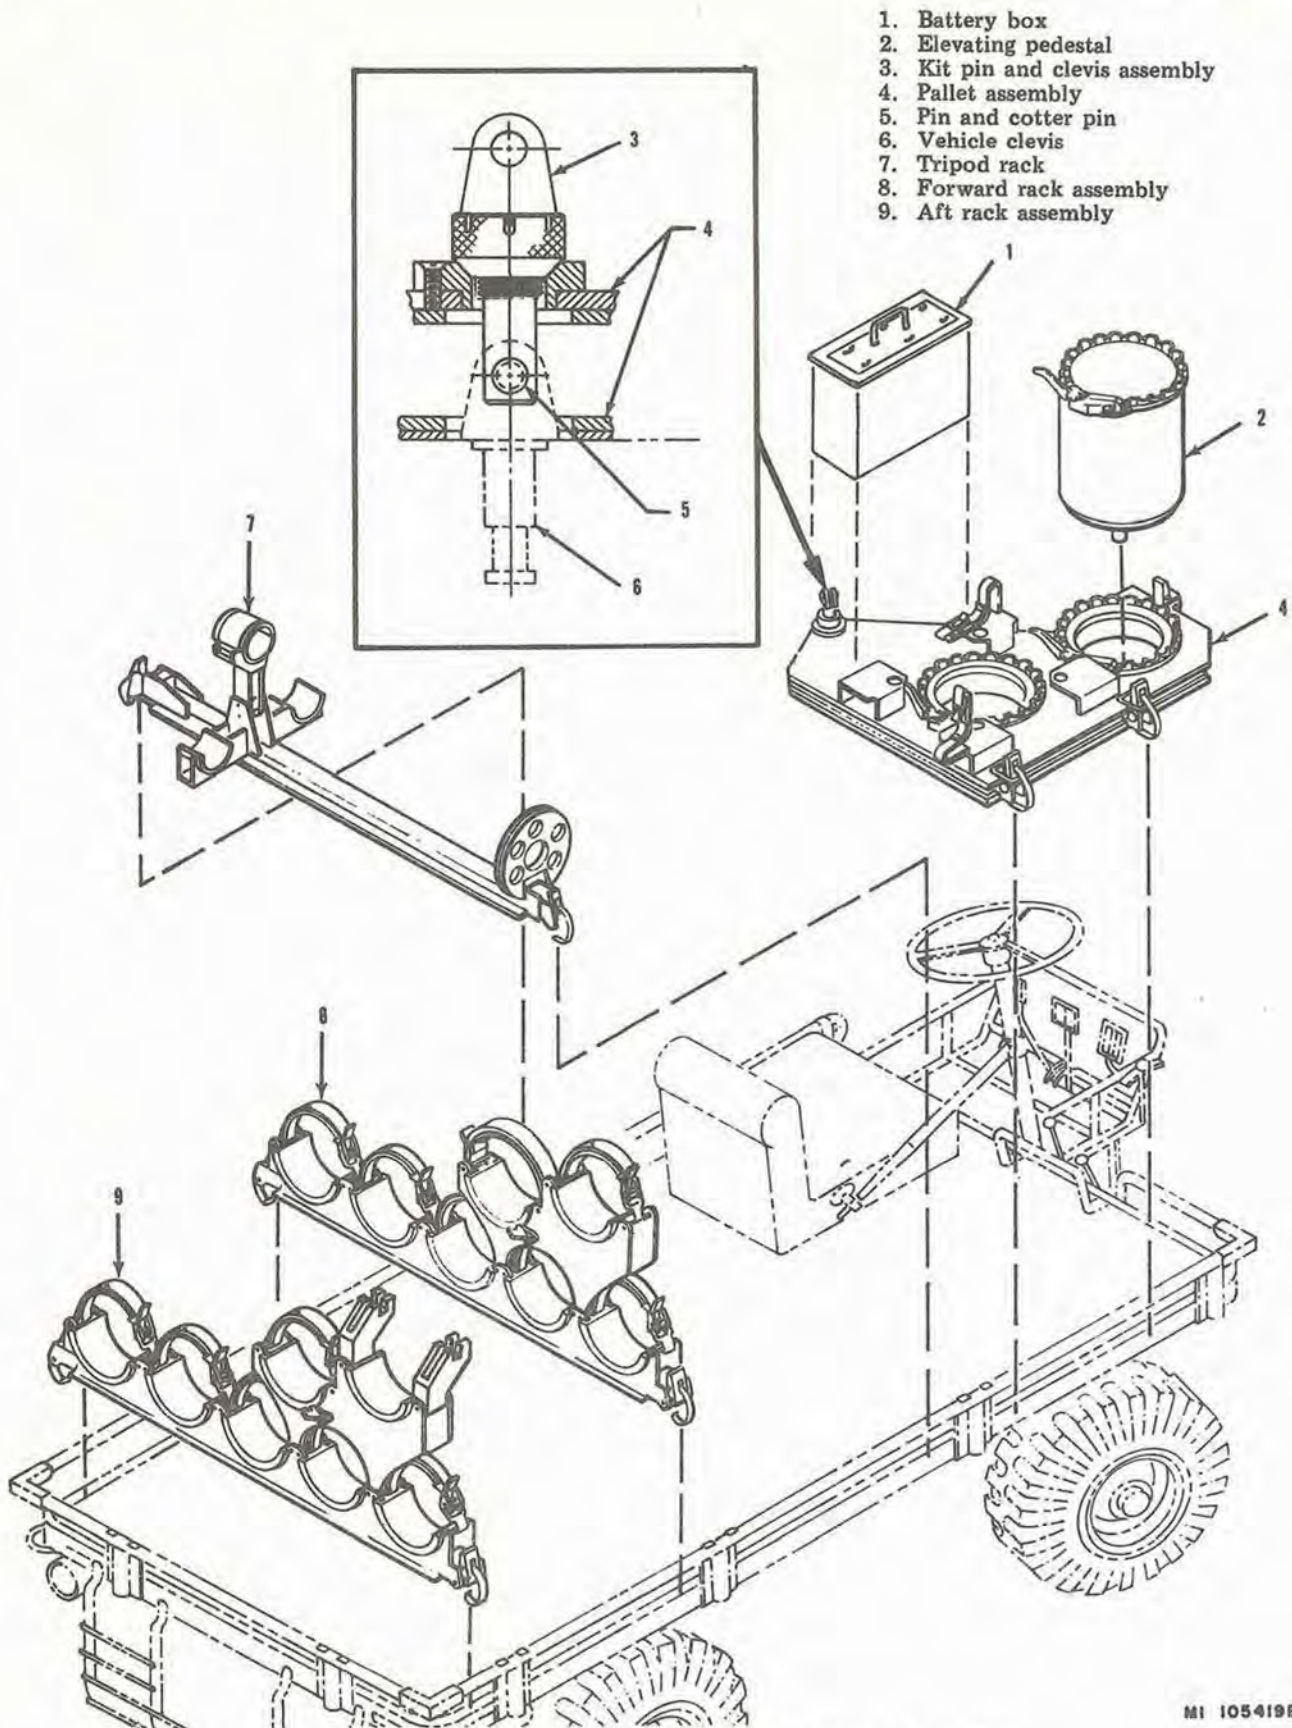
Installation of mounting kit on 1/2-ton vehicle.
